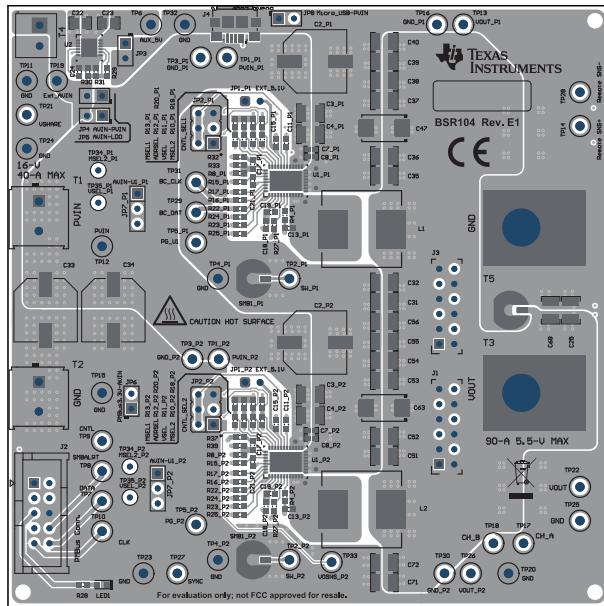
TPS546B24AEVM-2PH Top Side Component View (Top View)
